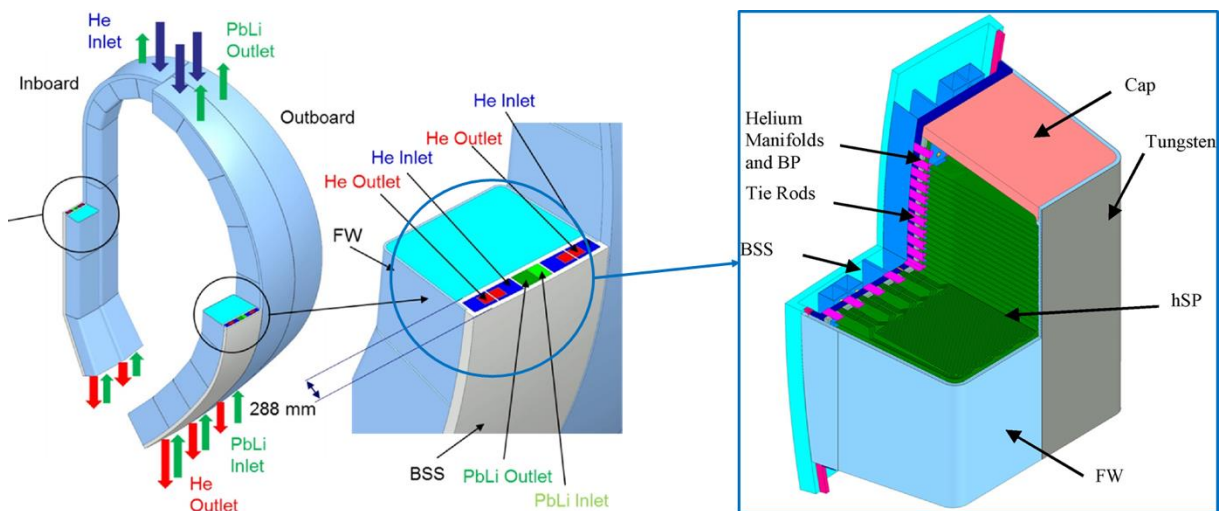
HCLL breeding blanket design concept (left) and equatorial outboard module (right) [23]
